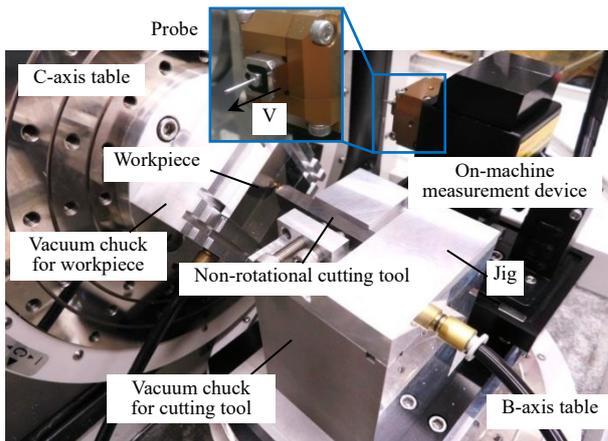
Tool and workpiece setting on ultraprecision machining center
